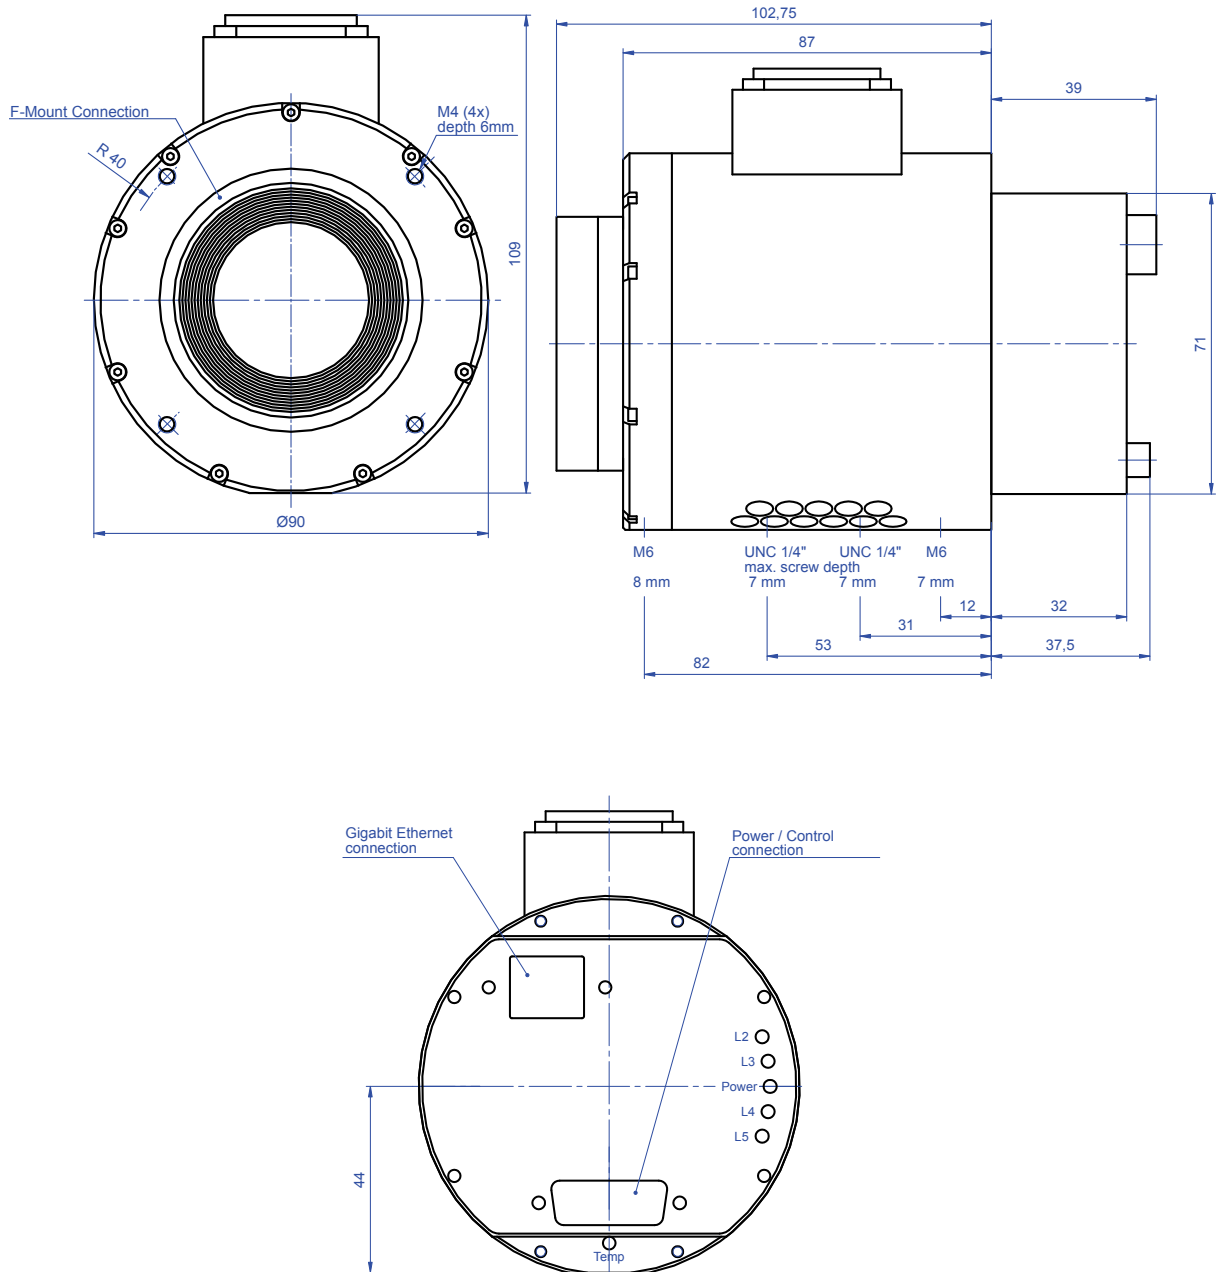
Camera dimensions: Bigeye P-629B Cool / Solar Cool (front/side/back)
